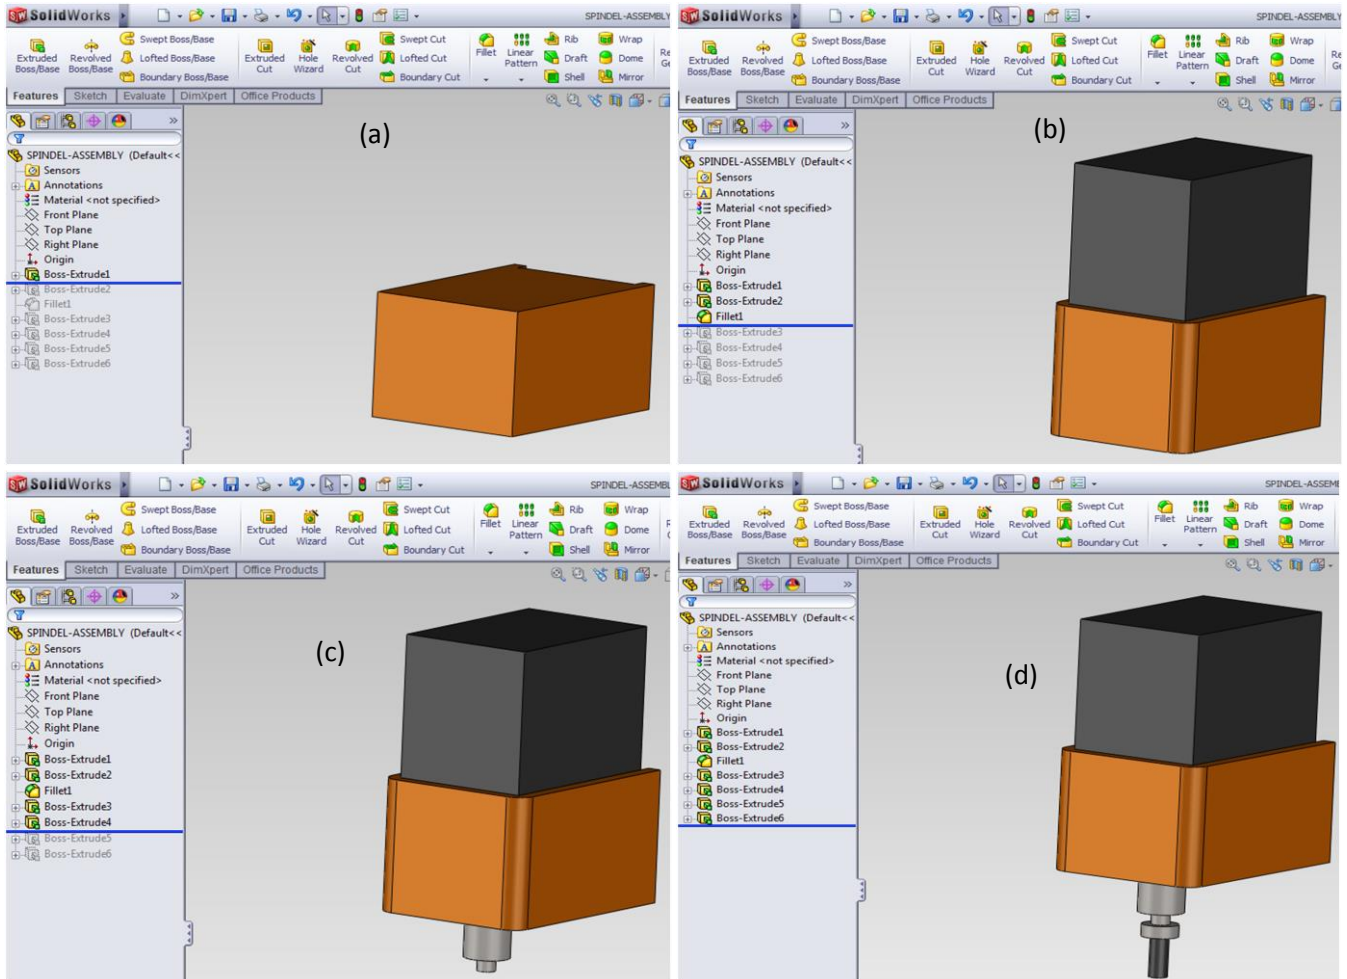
Modeling machine Y-axis machine structure and machine bed (a), Machine box frames (b, c, d).
